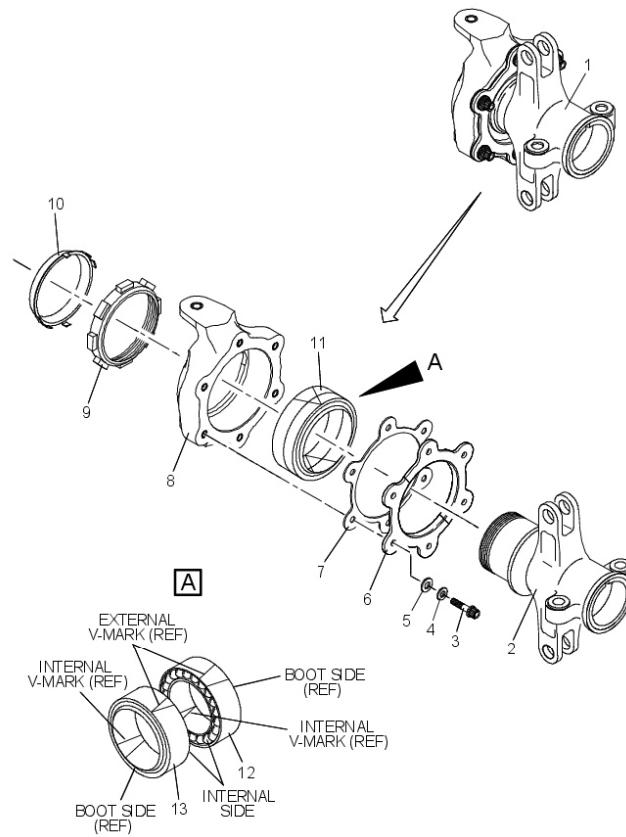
(sheet 3 of 4). Housing and slider group - Disassemble procedure (Sleeve assy P/N 109G6430A03)
